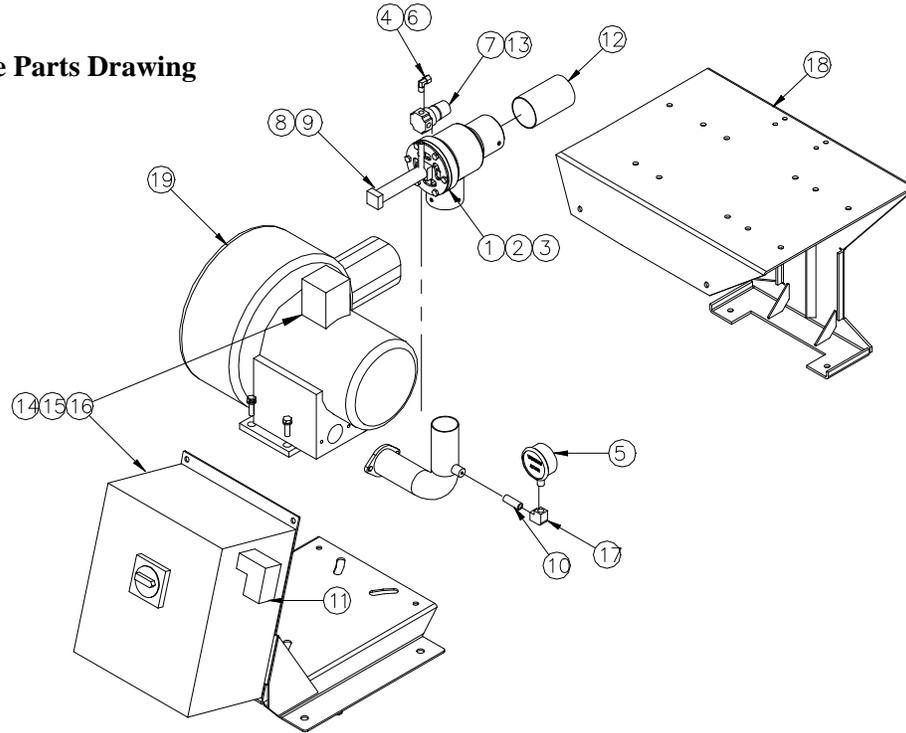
Centrifugal Vacuum Pump Spare Parts List
